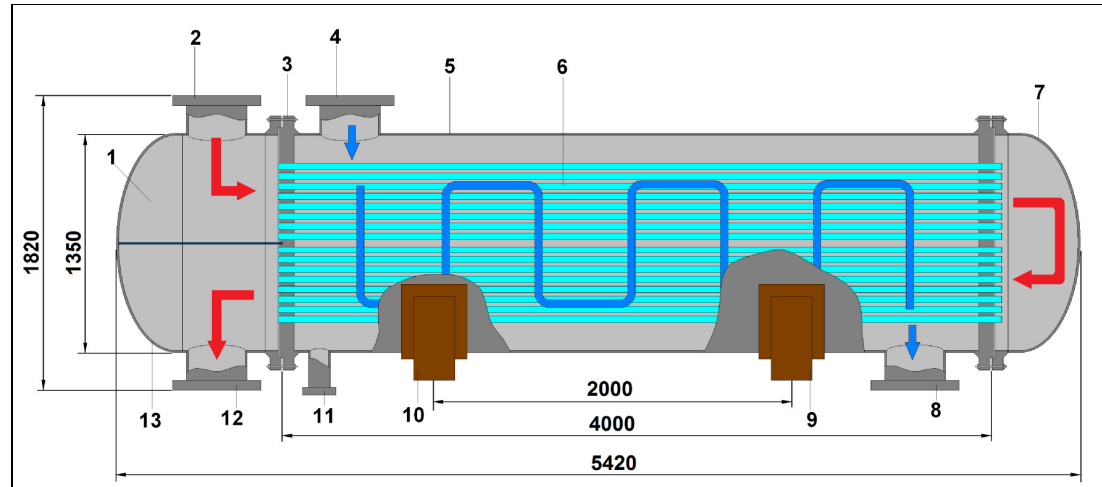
Heat-exchanger: 1 – distribution chamber; 2 – PCC input flange; 3 – guide grid; 4 – SCC input flange; 5 – HE shell; 6 – tube bundle; 7 – detachable lid; 8 – SCC output flange; 9 – moving support; 10 – stationary support; 11 – drain flange; 12 – PCC output flange; 13 - detachable lid.
